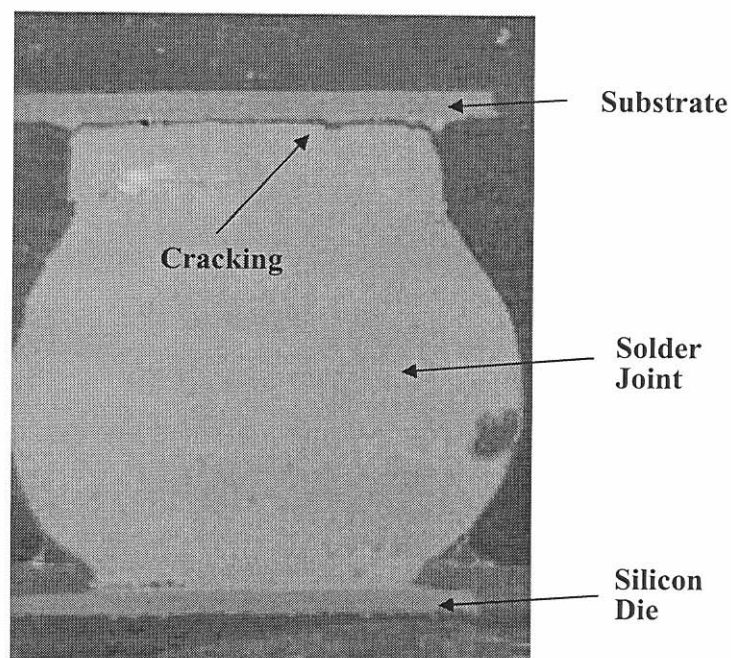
An example of failure of a solder joint by cracking between solder and substrate interface.
